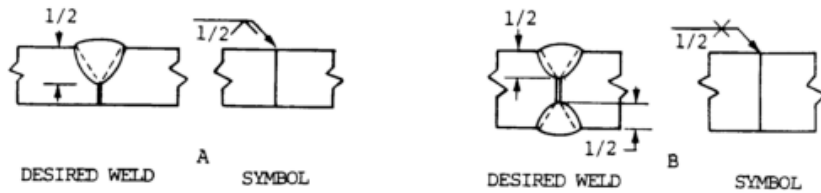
Groove weld dimensions for welds extending partly through the members joined.
